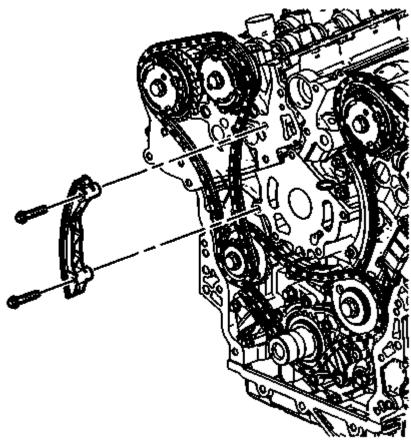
View Of Right Secondary Camshaft Drive Chain Guide & Bolts Courtesy of GENERAL MOTORS COMPANY
